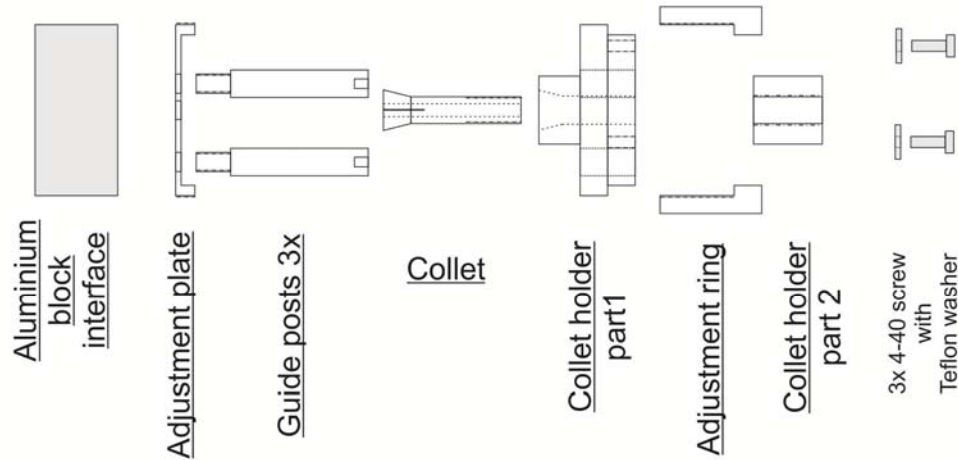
Explosive view of the ferrule positioning assembly. The individual parts are shown in the following figures.
